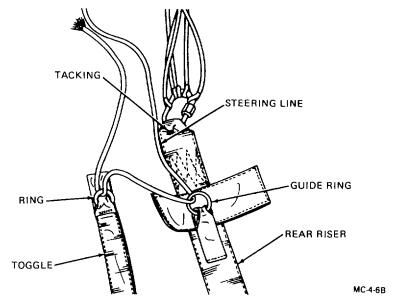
Riser Tacking and Steering Line Routing, Typical.
